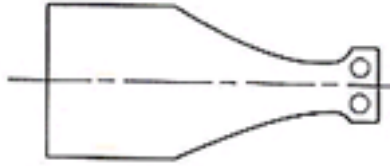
Reciprocating Bending Machine Test Specimen (after Fuchs and Stephens [20])
